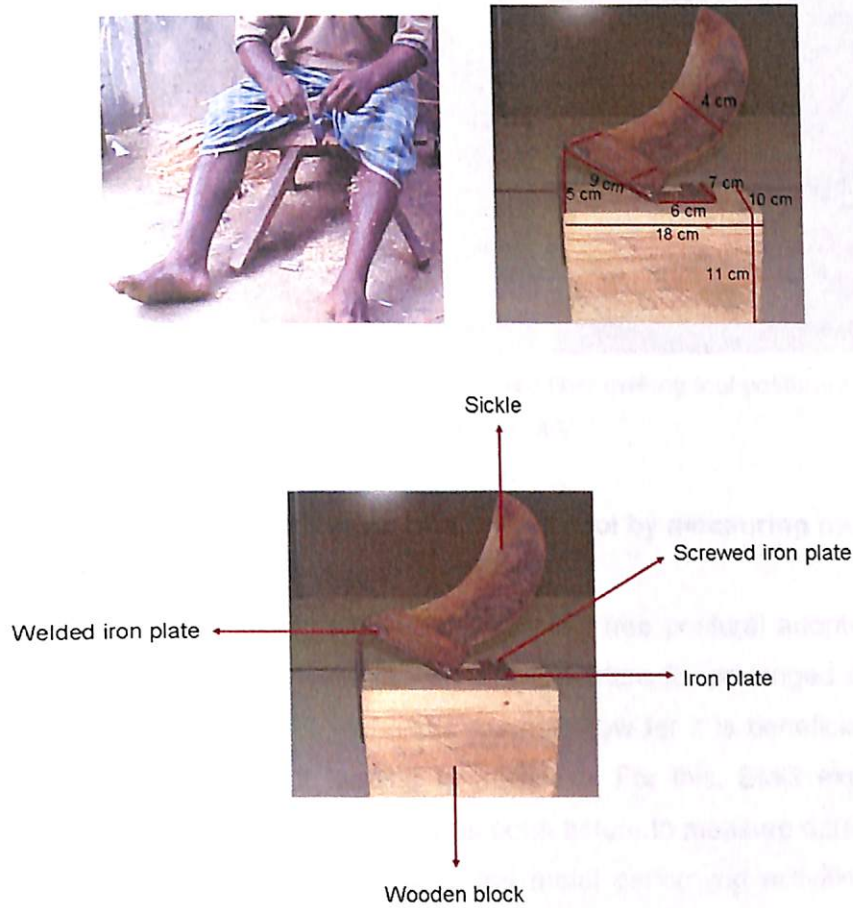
Top left: working with existing tool, Top right and bottom : modified fiber making tool
